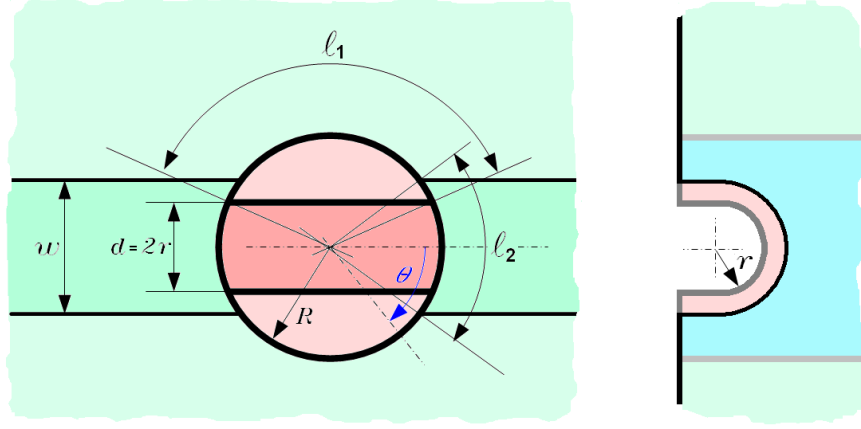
Valve Port and Runner Channel Geometry [29]
